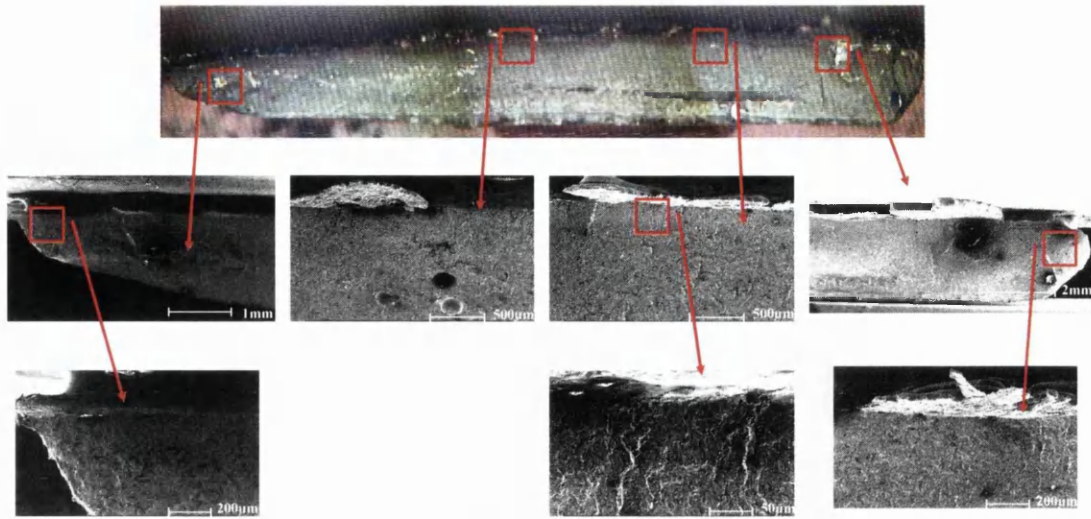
Typical Weld Throat Failure – Weld View, GM3
